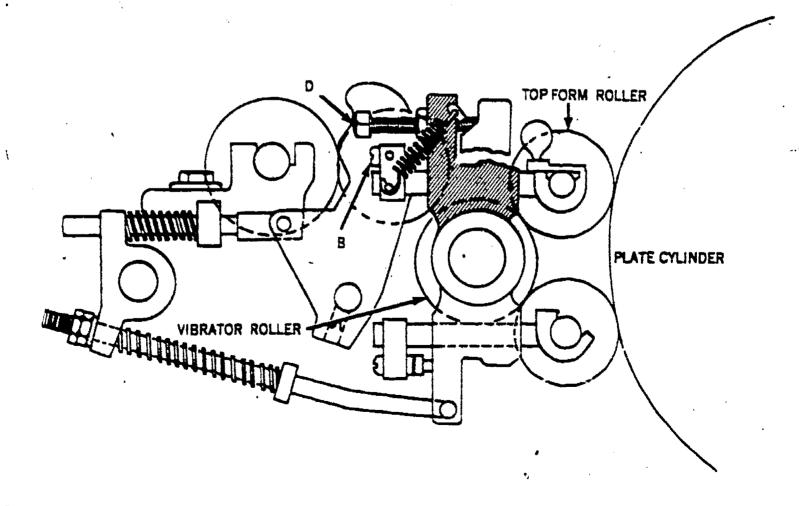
Setting and adjusting top form roller (dampening assembly).
